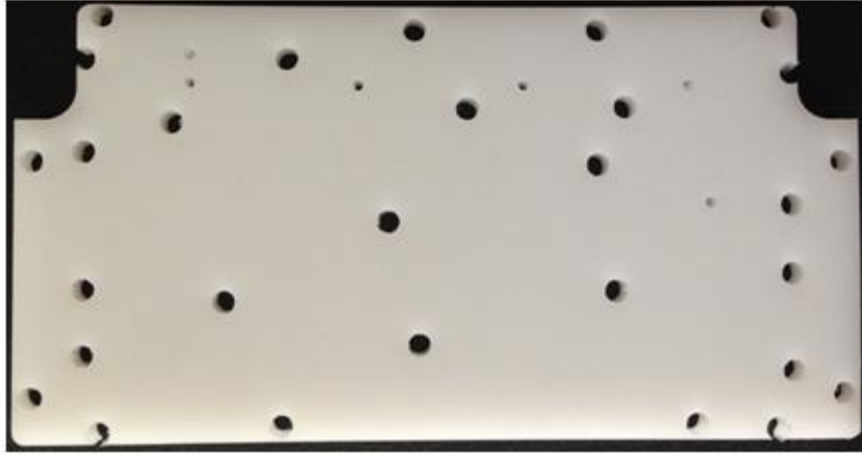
Prototype 1 made out of high density polyethylene (HDPE). The perimeter of HDPE back plate has incomplete screw holes. Prototype was made with a laser cutting machine with a tolerance of 0.001". Incomplete screw holes is due to the diameter of the laser cutting tool being slightly larger than the desired screw holes.
